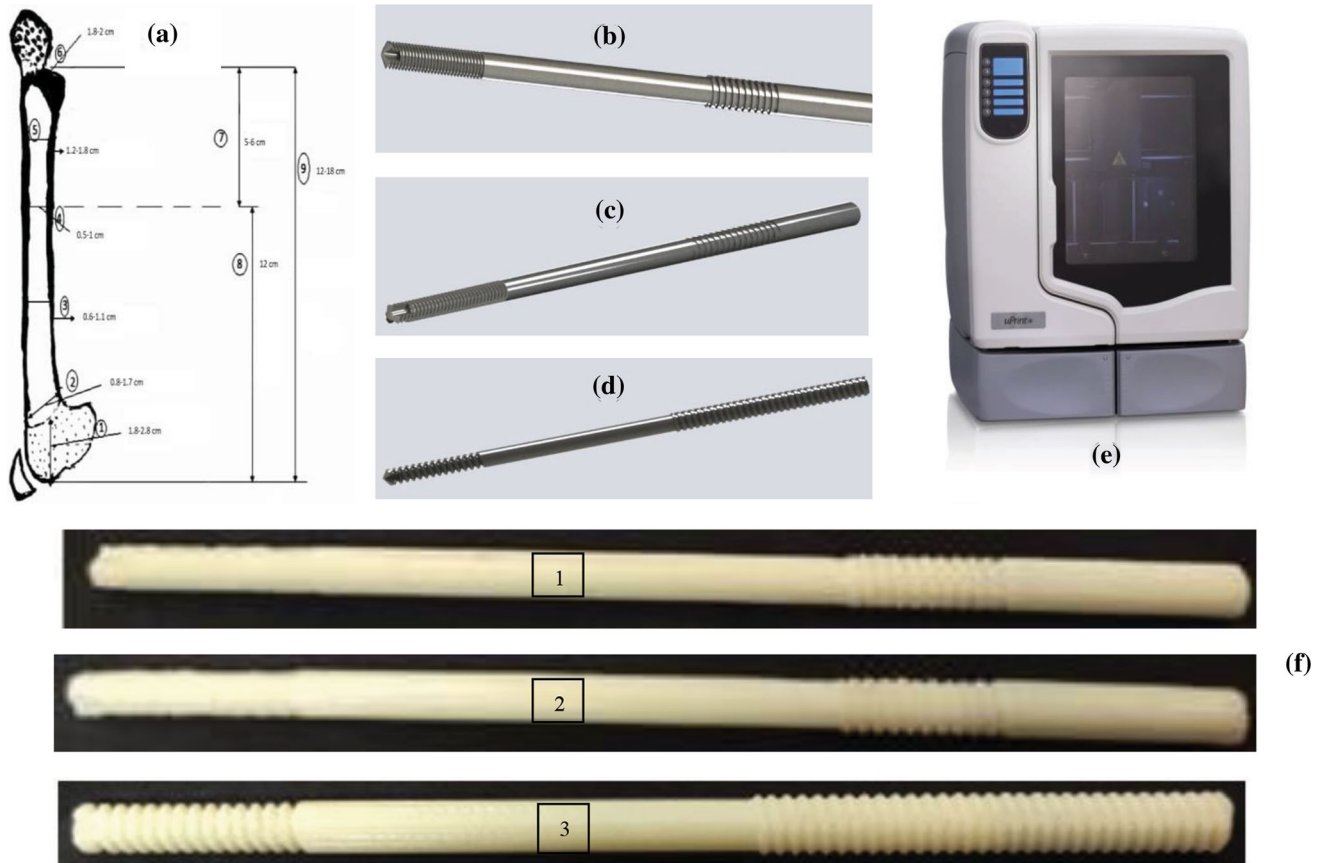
(a) Selected bone for IM pins (b) CAD of simple threaded pin (c) CAD of tapered threaded pin (d) CAD file of the double-threaded pin (e) FDM printer (f) ABS printed threaded pin
